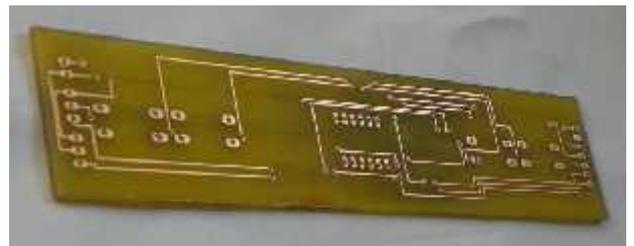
al circuit diagram result after corrosion (removal of copper which is useless) - side one
